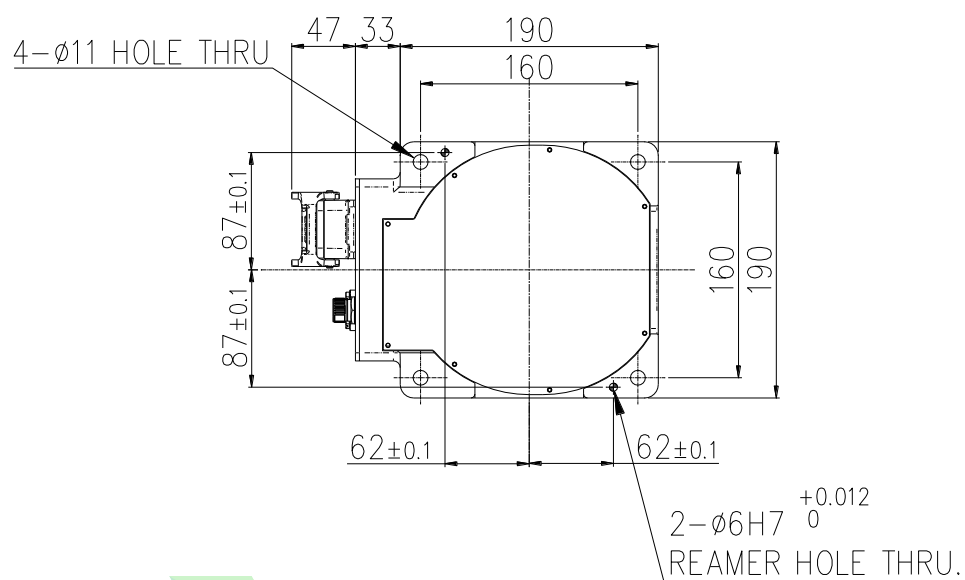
Robot installation surface dimension (HH4L/HH7/HH7E/HH8)
